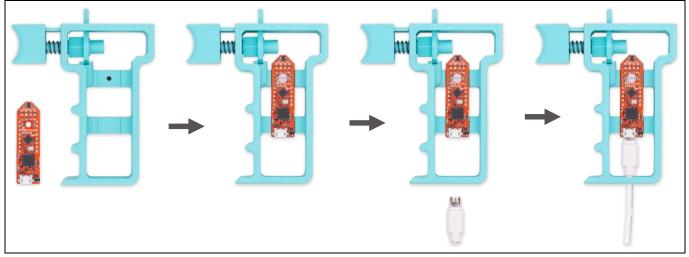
XENSIV[™] DrillTriggerV2 - assembly
